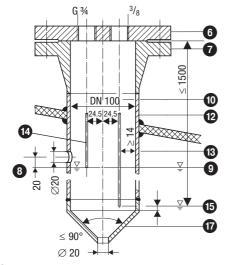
Protection tube (provided on site) for installation inside the boiler and in combination with other GESTRA equipment
